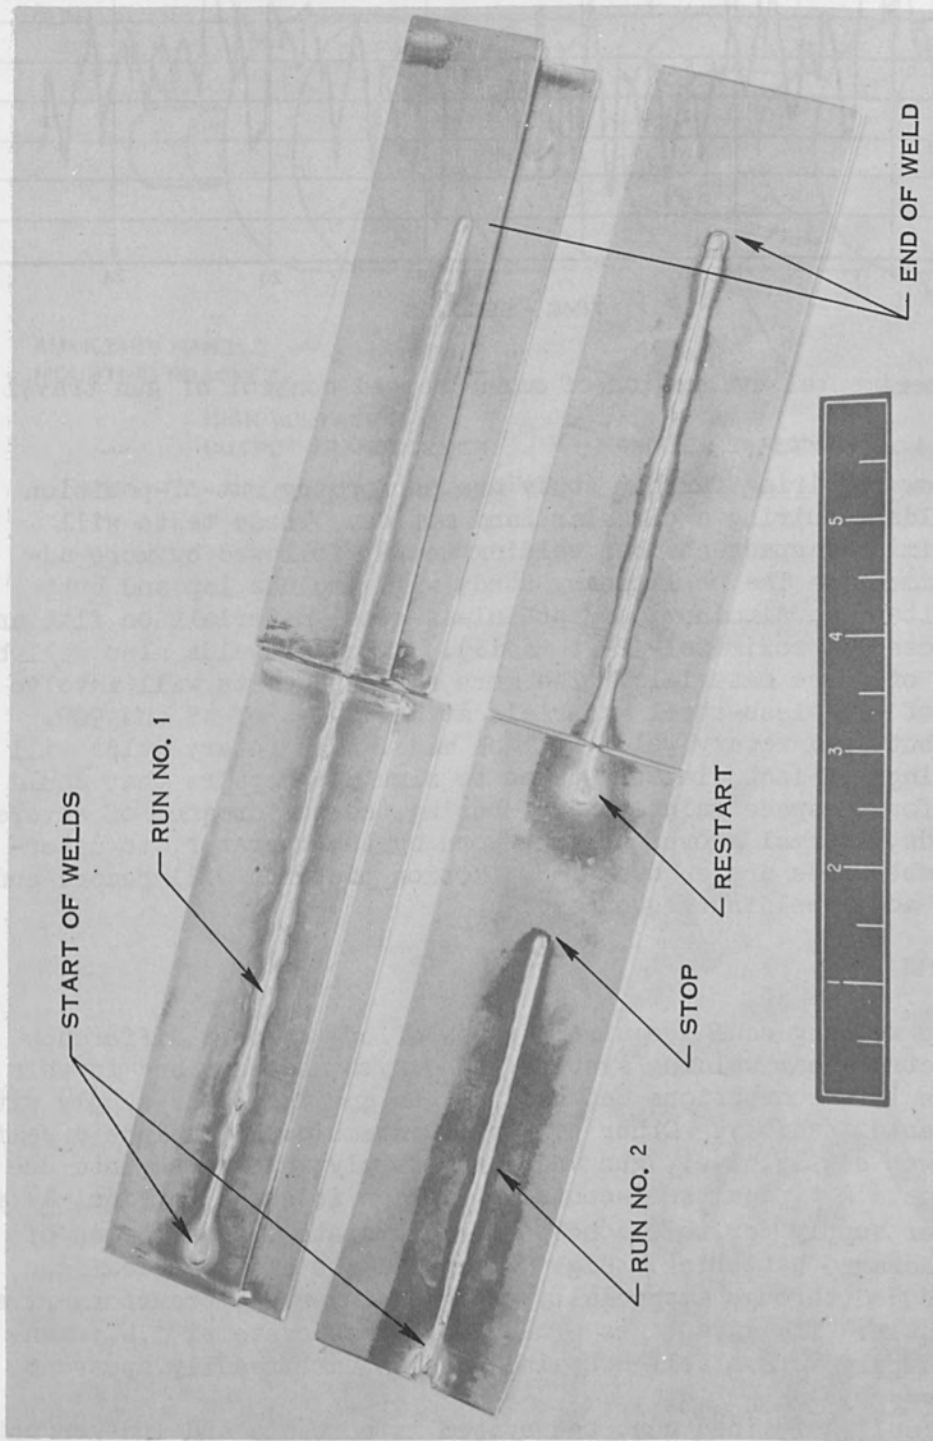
Electron-beam welds made by hand-held gun.
